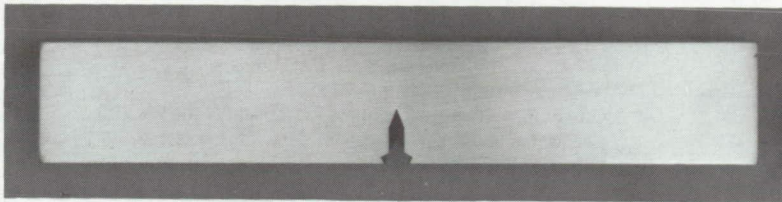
Flaw at which fracture initiated in 260-inch-diameter motor case.
